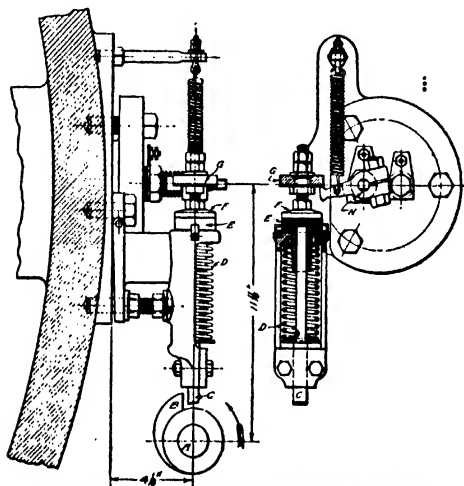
Mechanically Operated Igniter for Allis-Chalmers Gas Engine
